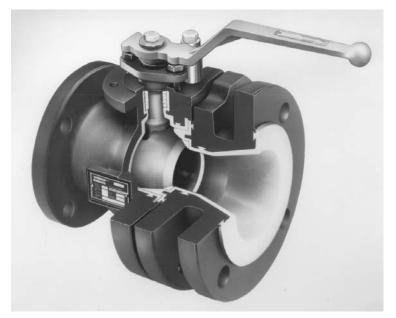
Quarter-turn handle mounted on lined ball valve. (*Courtesy of Atomac/The Duriron Company, Valve Division*)
